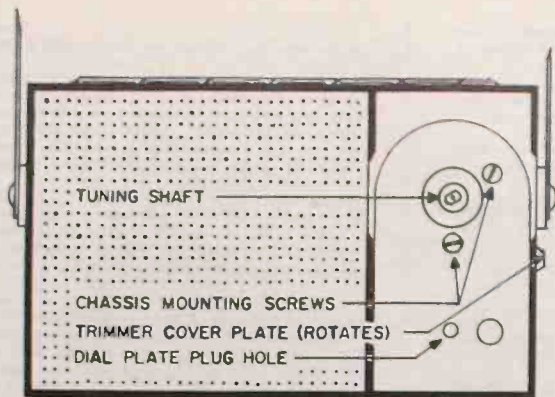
FRONT VIEW—DIAL PLATE REMOVED
